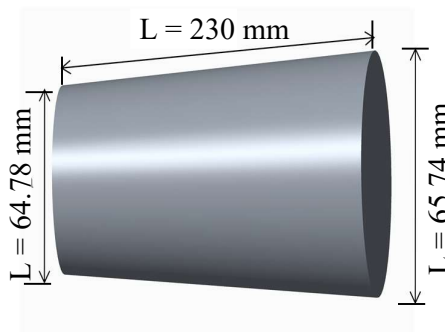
Dimensions of the cylindrical extrusion punch surface area to be used for MR finishing
